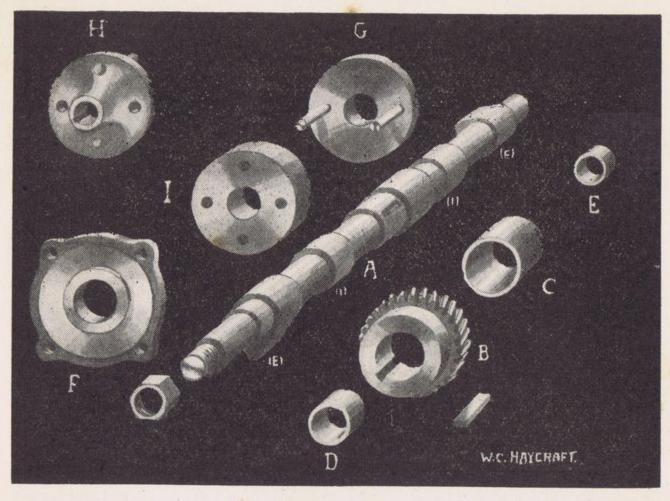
THE CAMSHAFT, CAMSHAFT BEARINGS AND MAGNETO COUPLING
